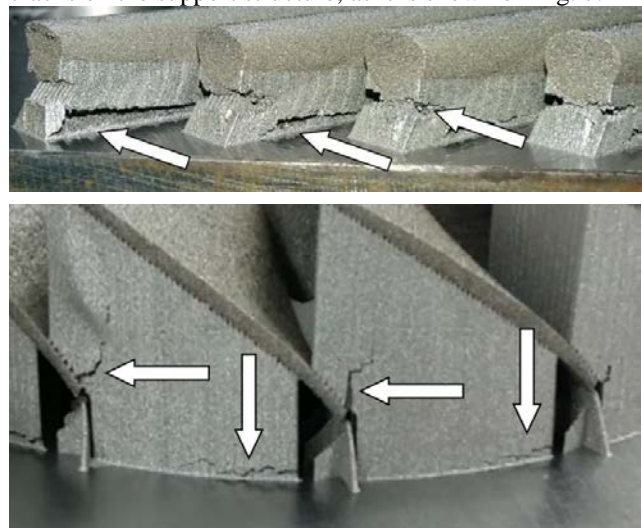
Example support structure cracks, caused by residual stress on DMLS build part
